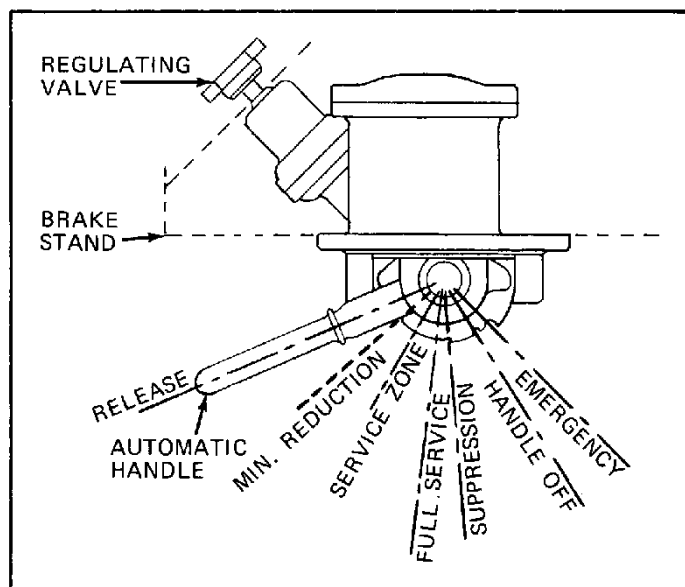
AUTOMATIC BRAKE VALVE HANDLE POSITIONS.
